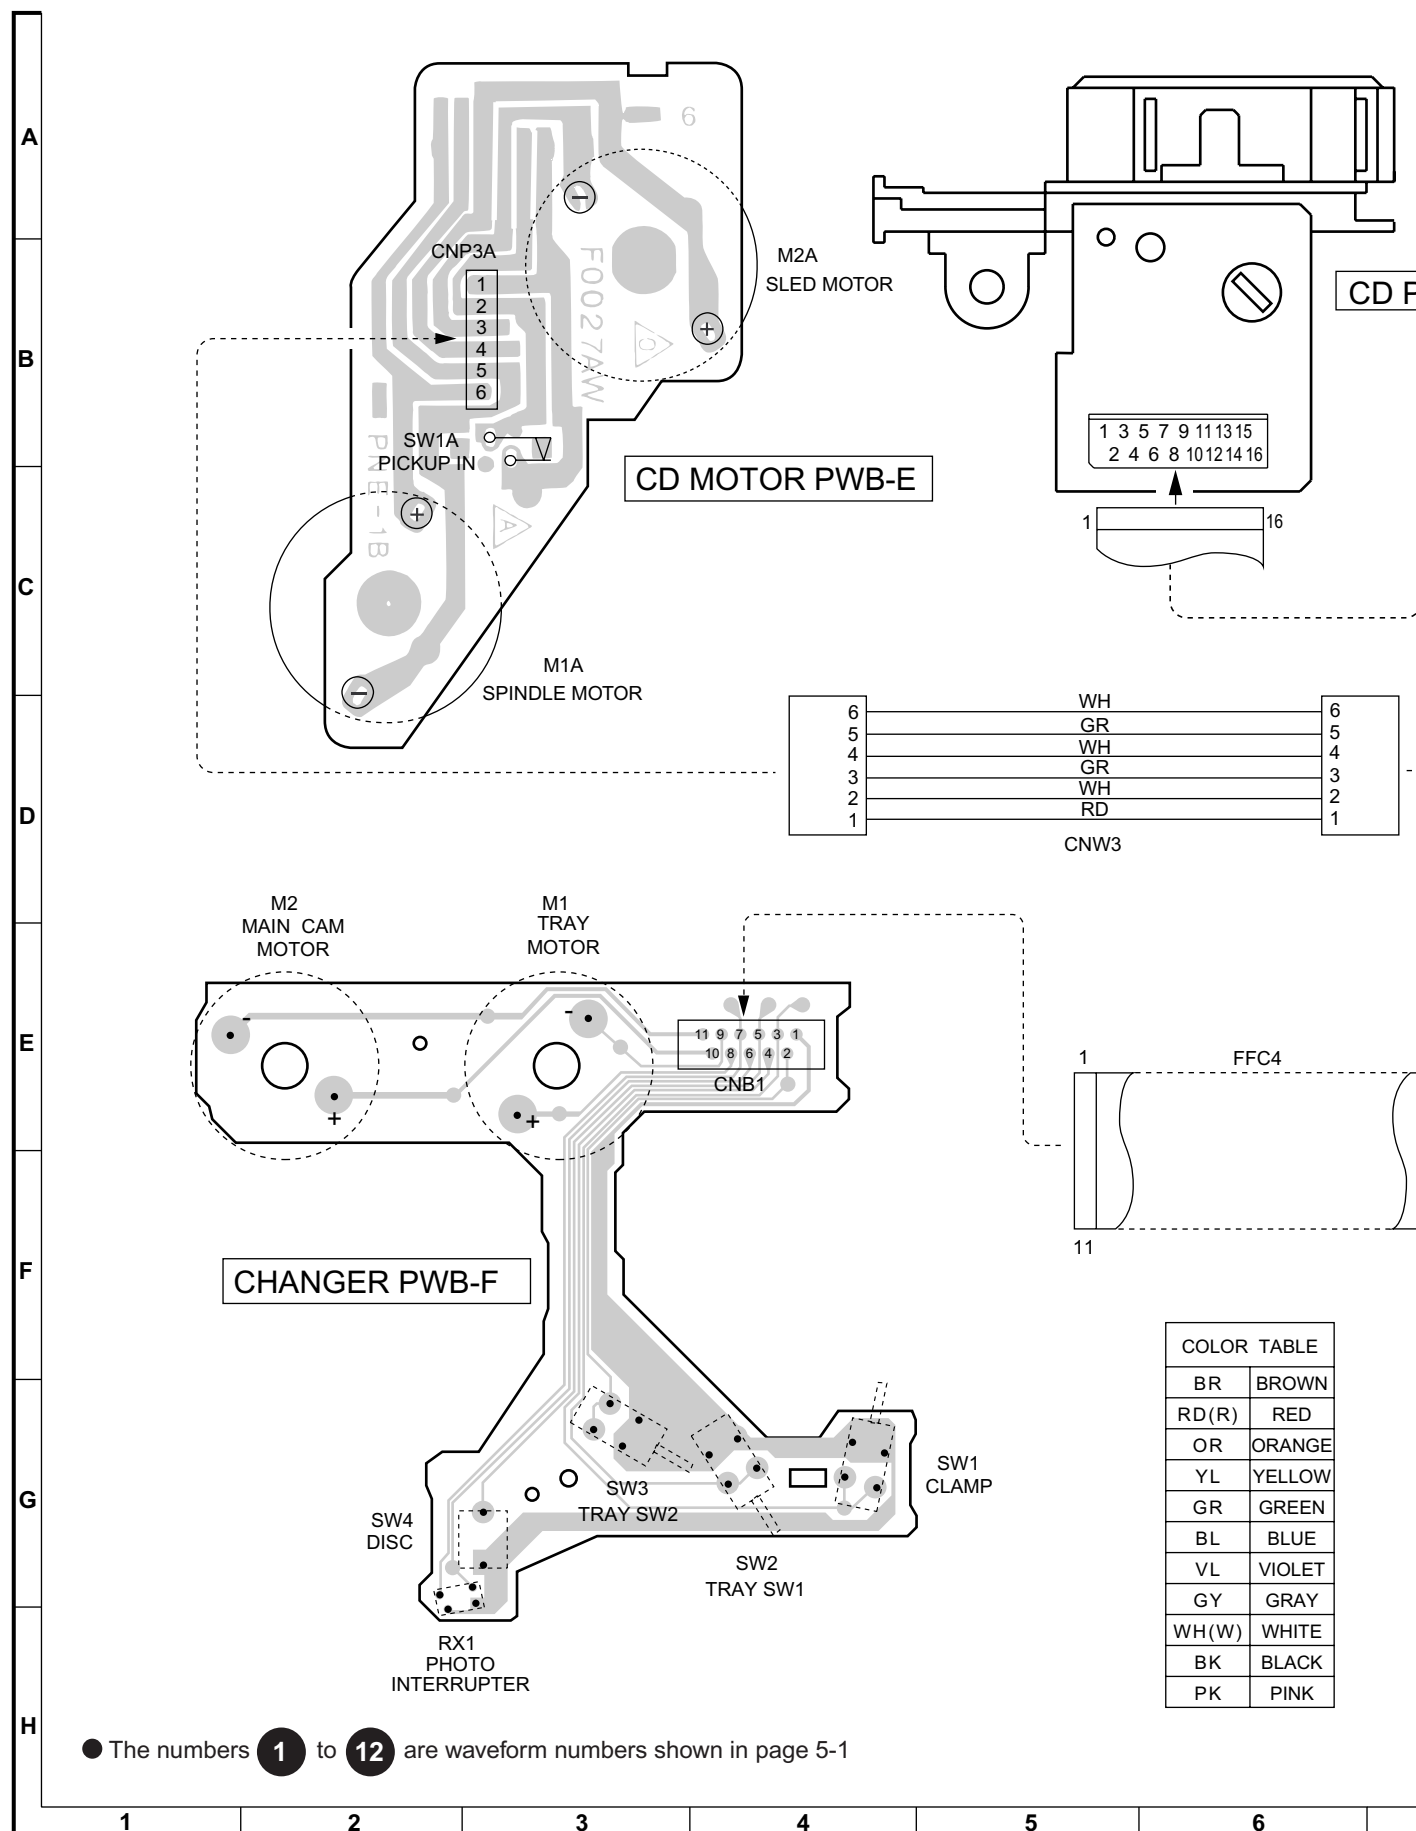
WIRING SIDE OF P.W.BOARD (5/9)
